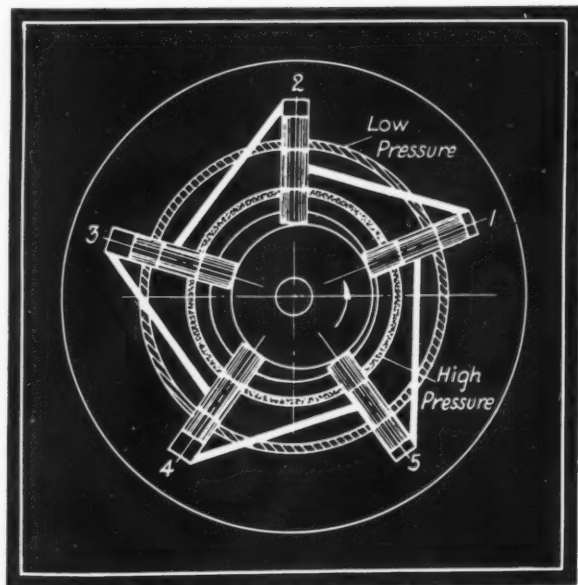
Booster pump for high pressures and low volume, the five pistons being reciprocated by an eccentric rotating in a counterclockwise direction. Fig. 4—Right—Milling machine with four sets of cutters for milling locating pads on two crankshafts
